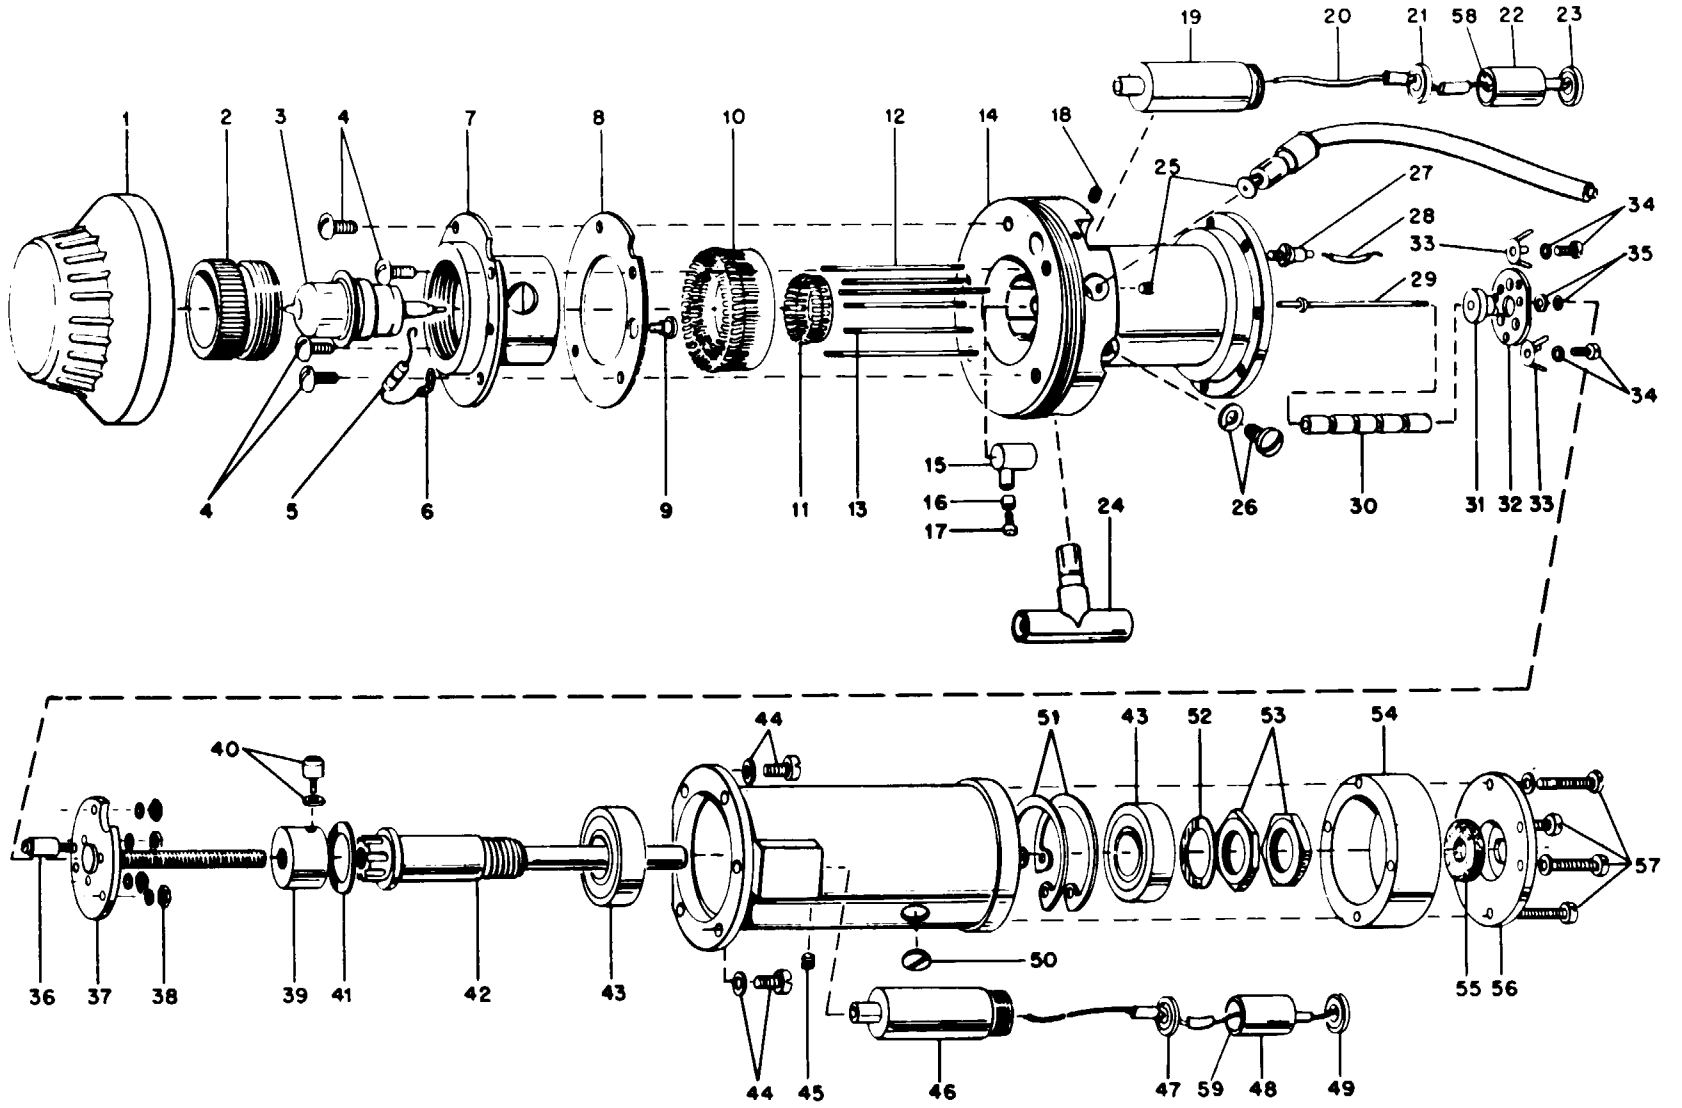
Oscillator Assembly 8A1, Exploded View
